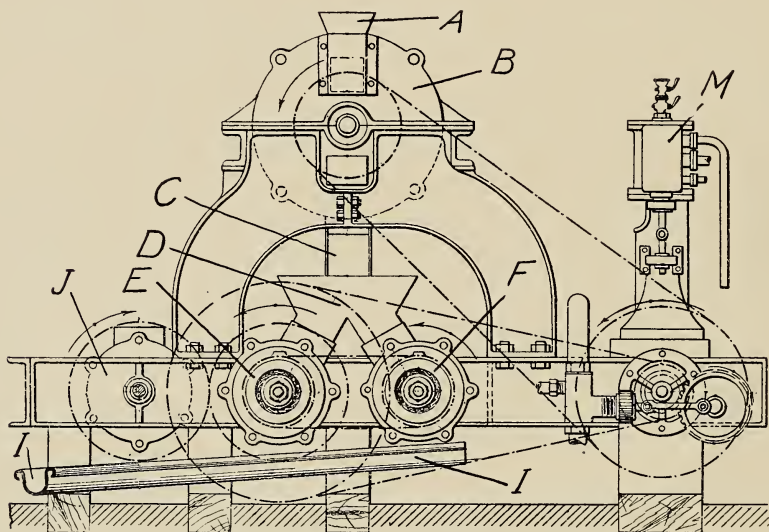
THE GUIGUET CRUSHER AND EXTRACTOR.
